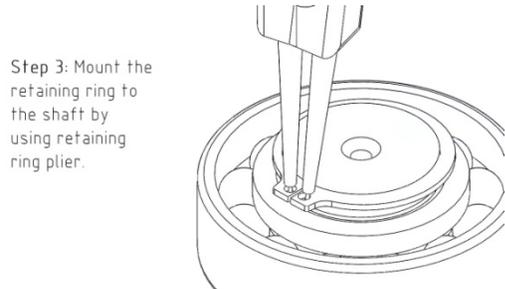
The 3D drawing of the mounting of a retaining ring onto the shaft end
